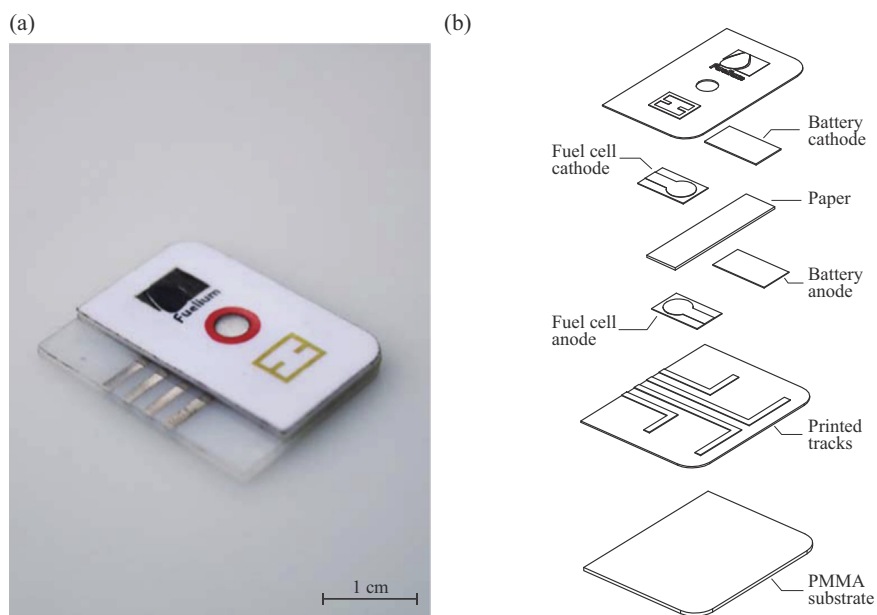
a) Picture of paper-based test strip. b) Exploded view of its main components.
